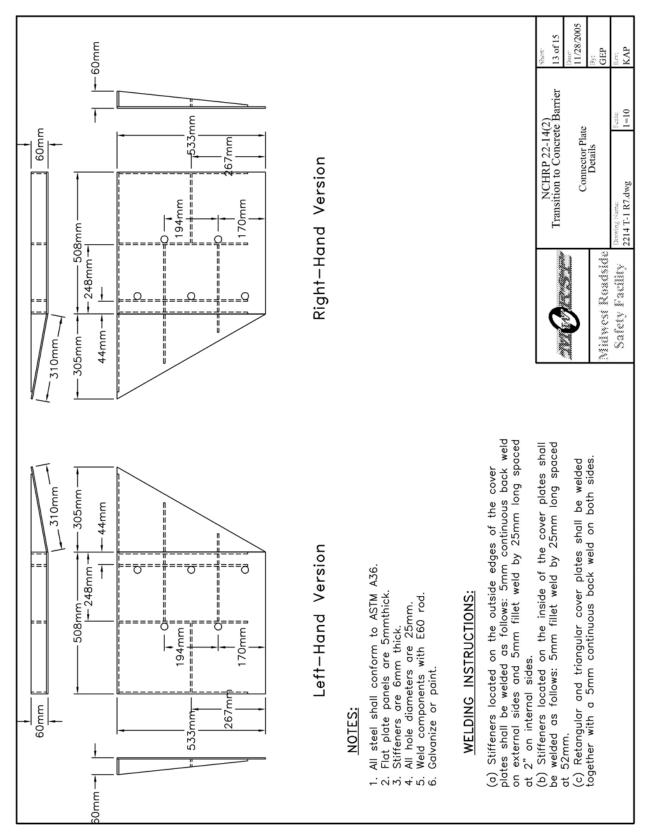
Approach Guardrail Transition to Concrete Barrier Design - Connector Plate Details
